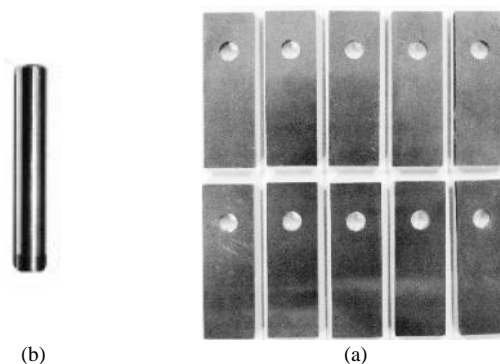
a) AISI4340 fatigue test specimens and b) tungsten carbide pins used in the experiments
